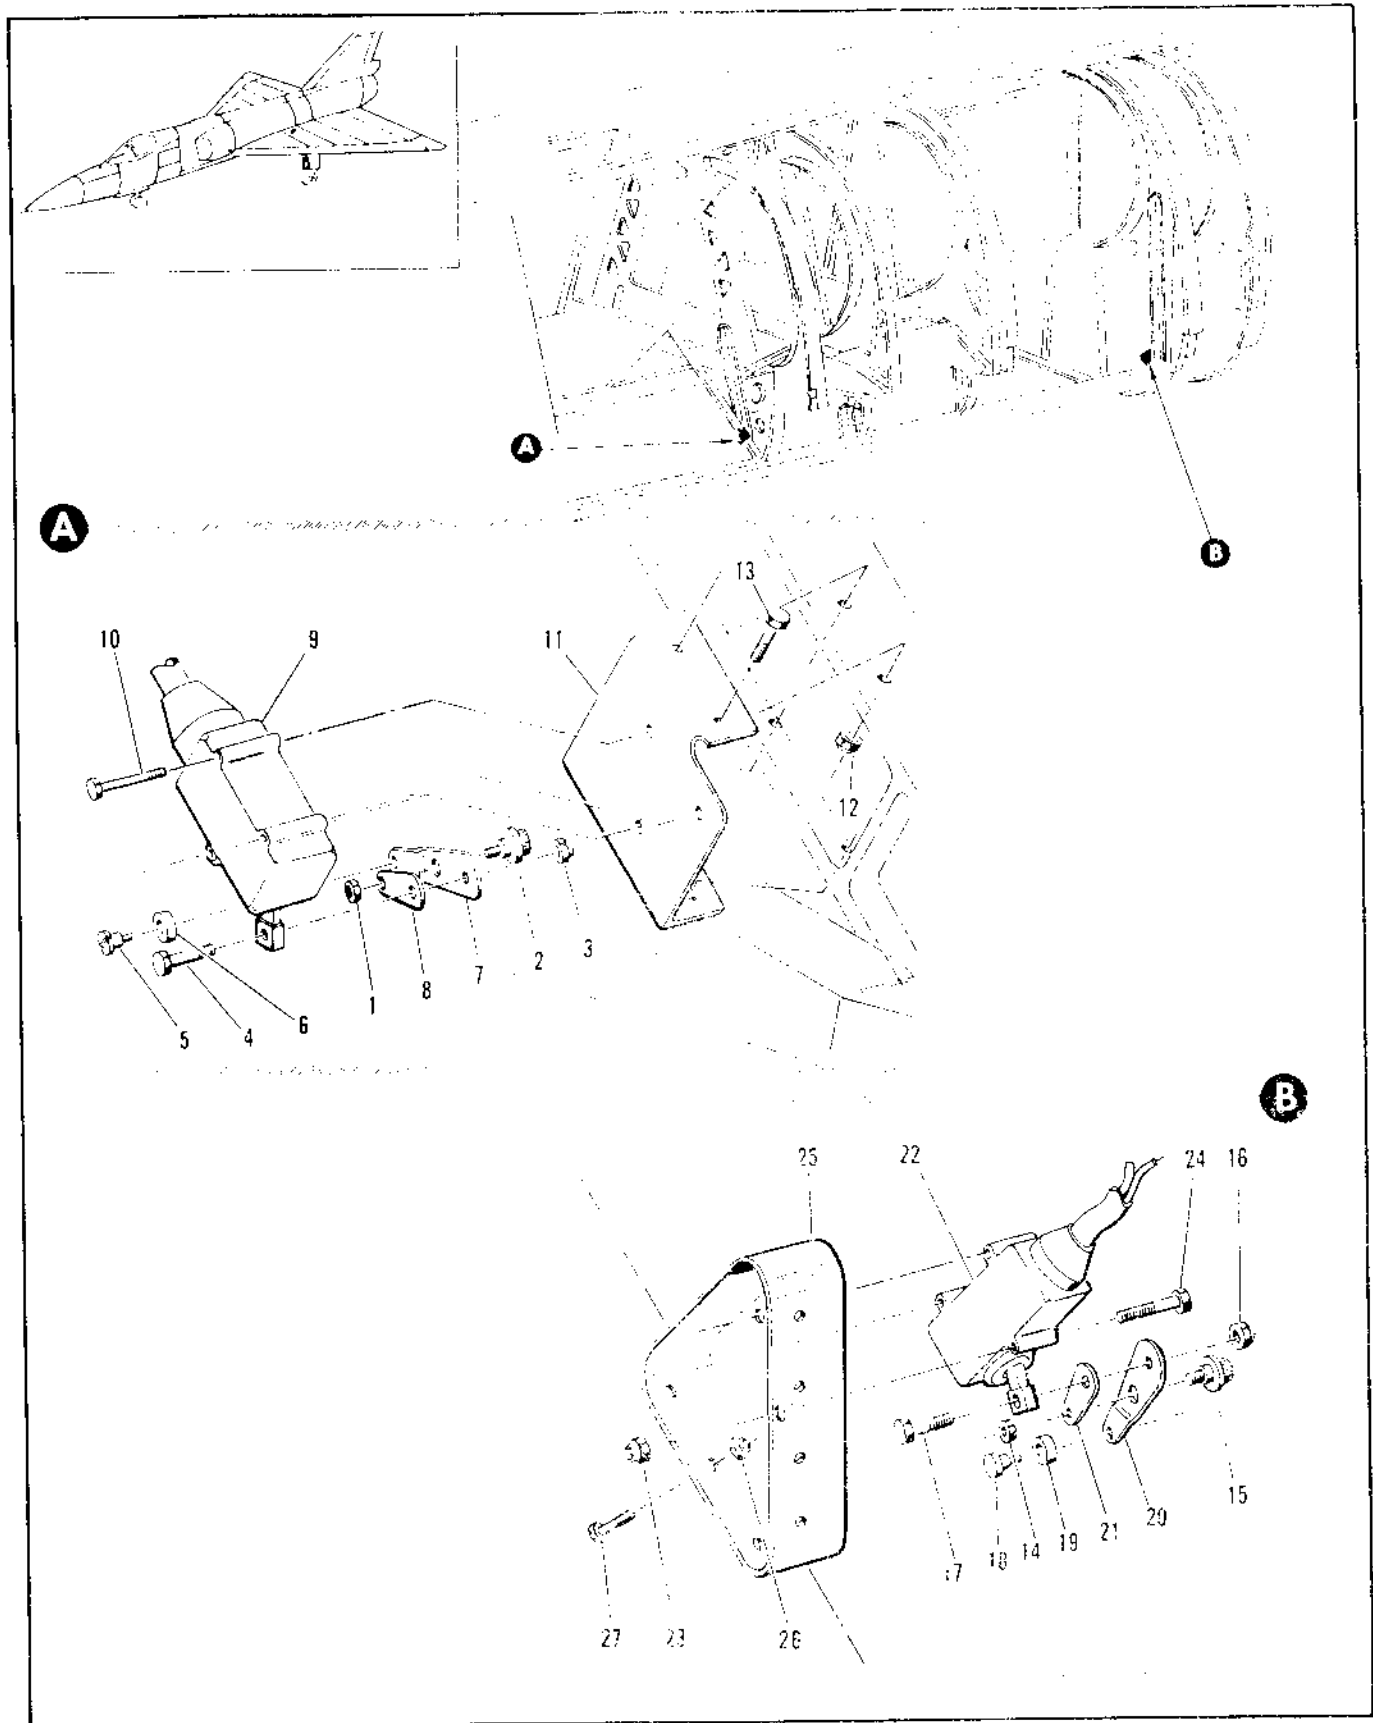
Armament Bay Door Open and Closed Switch
